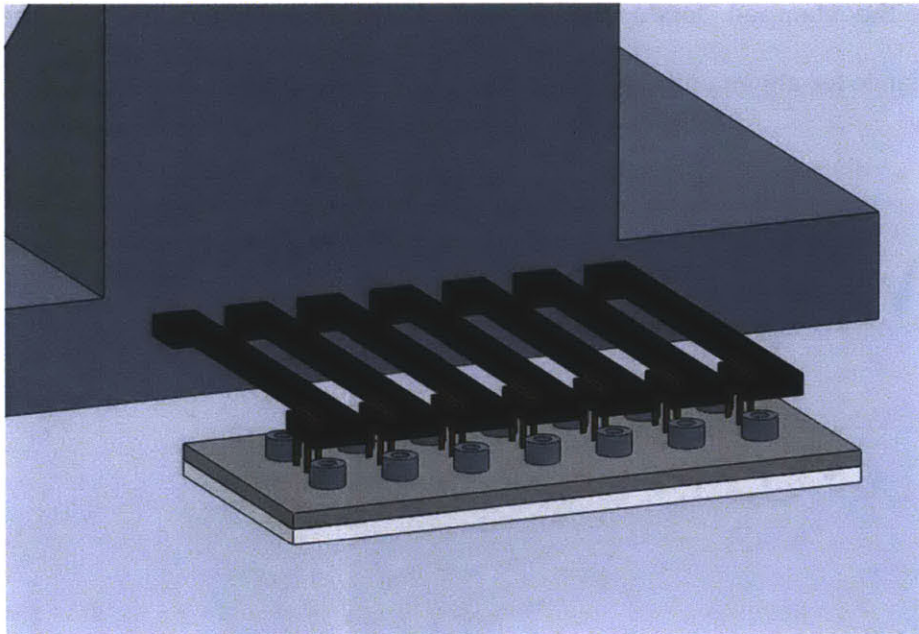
4 Detailing of Conducting Element and Coupling Sensor System
